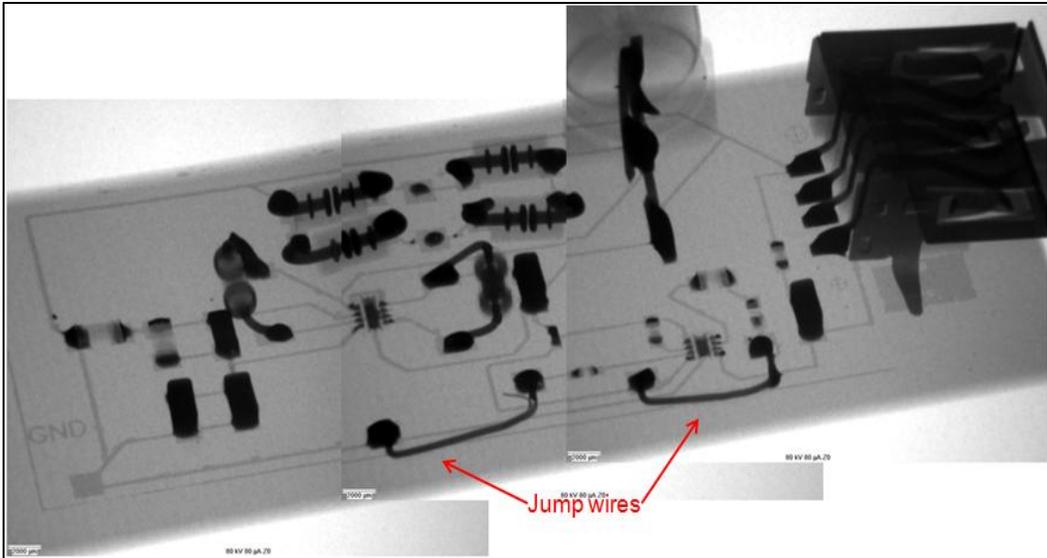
X-ray of PCB. Each part of the board was expected to ensure no shorting had occurred.
